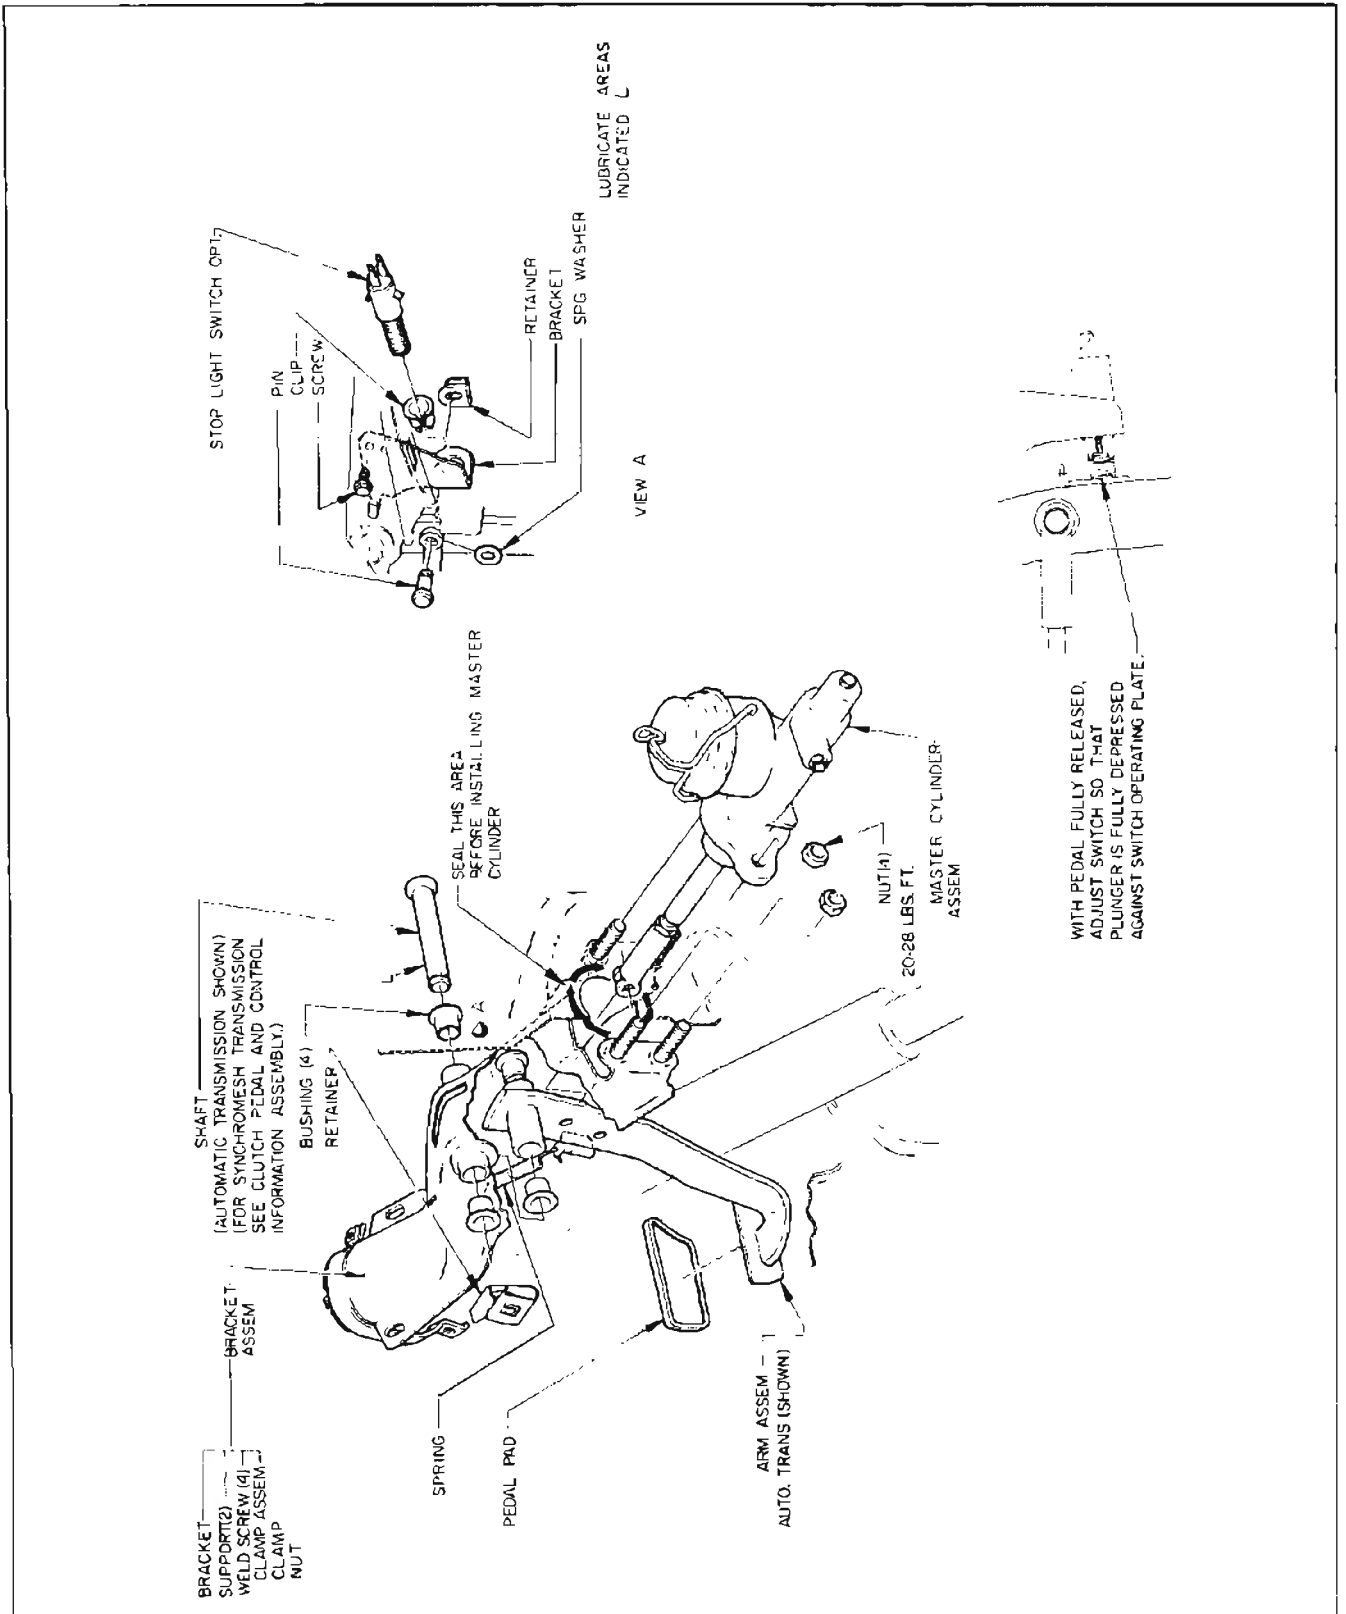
Mounting of Brake Pedal and Master Cylinder
